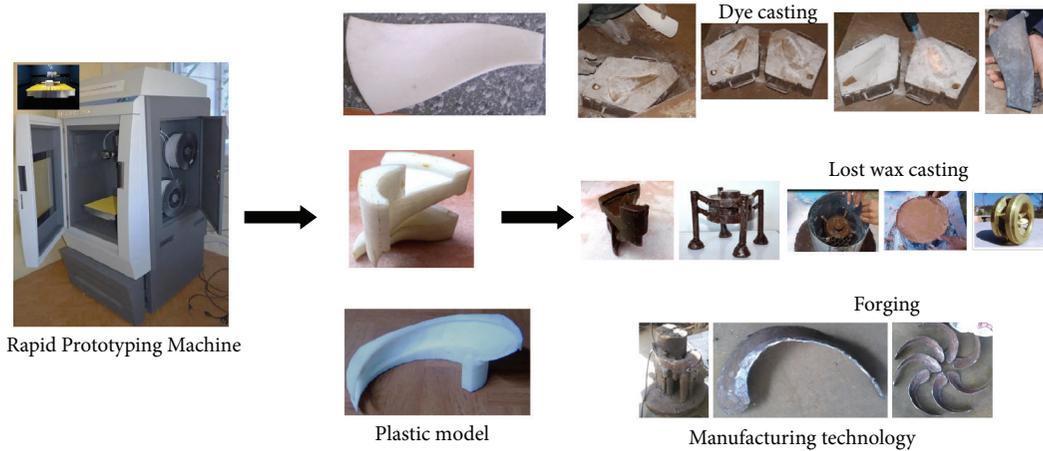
Computer Aided Manufacturing and Workshop Manufacturing.
